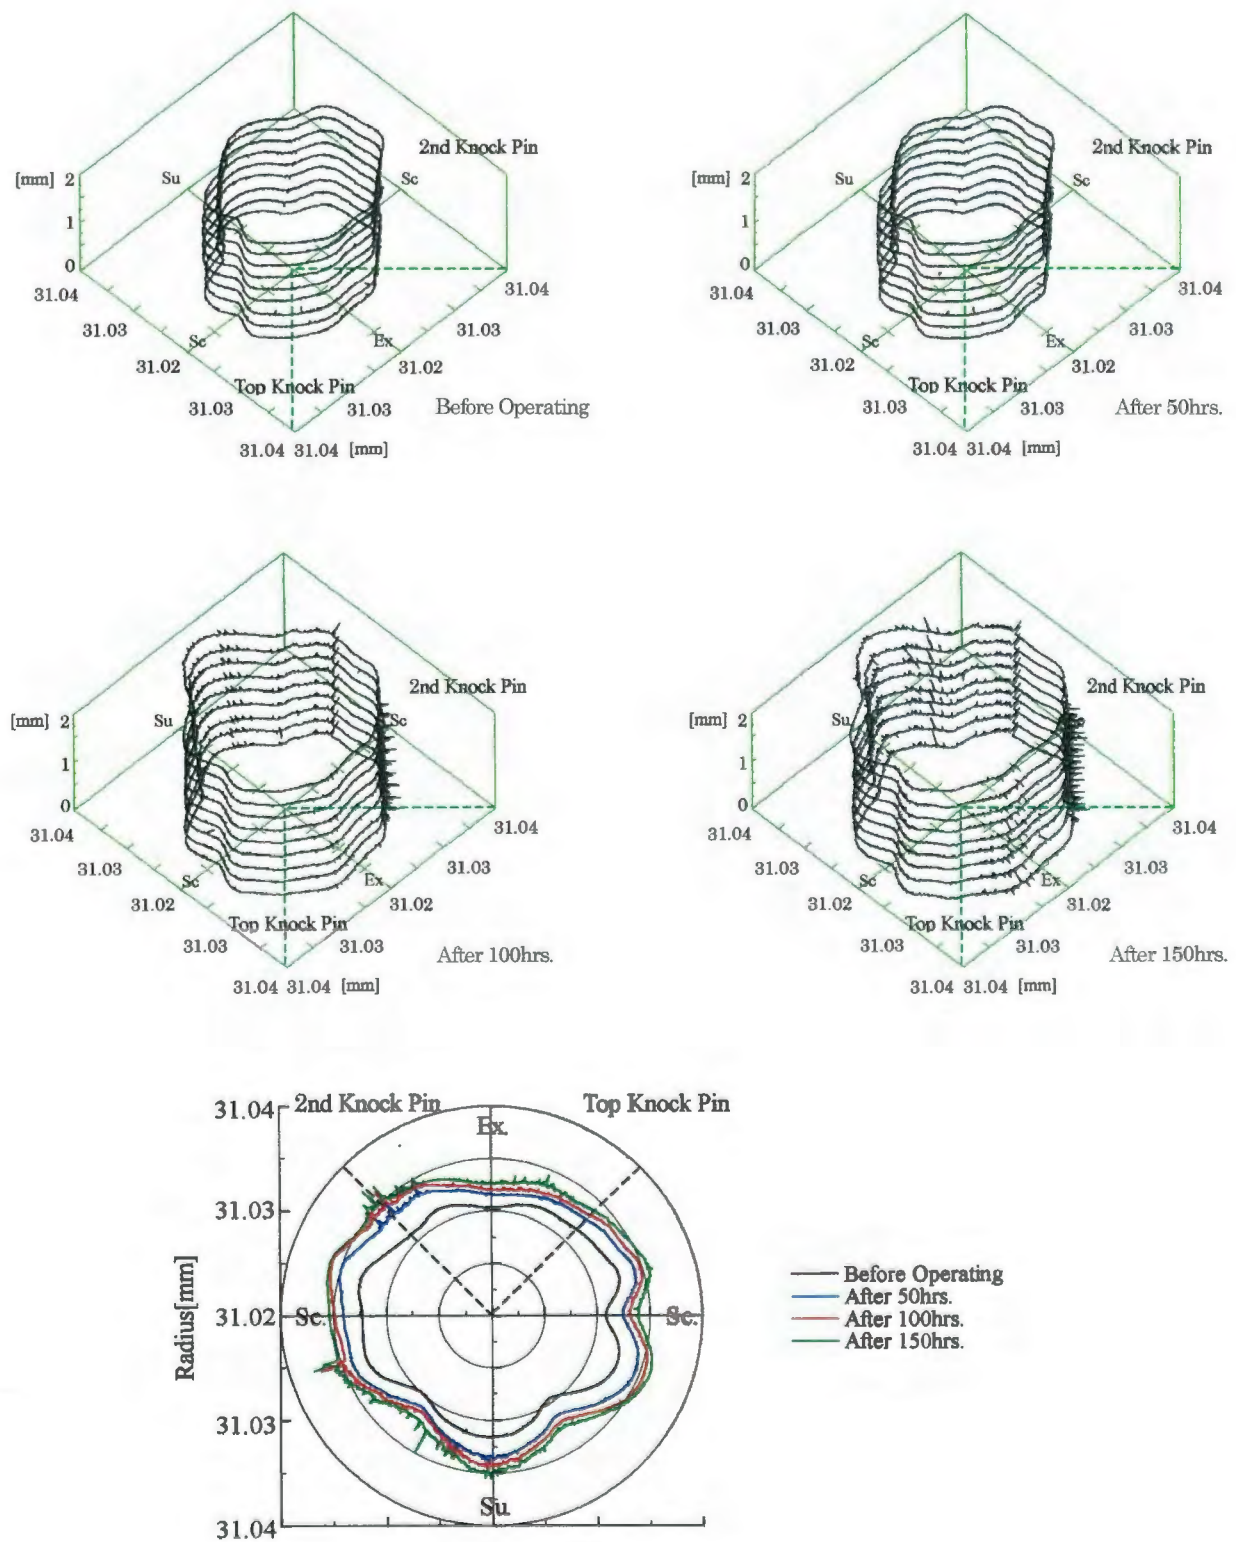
(g) The three dimensional and plane form of cylinder G2(RND7)
